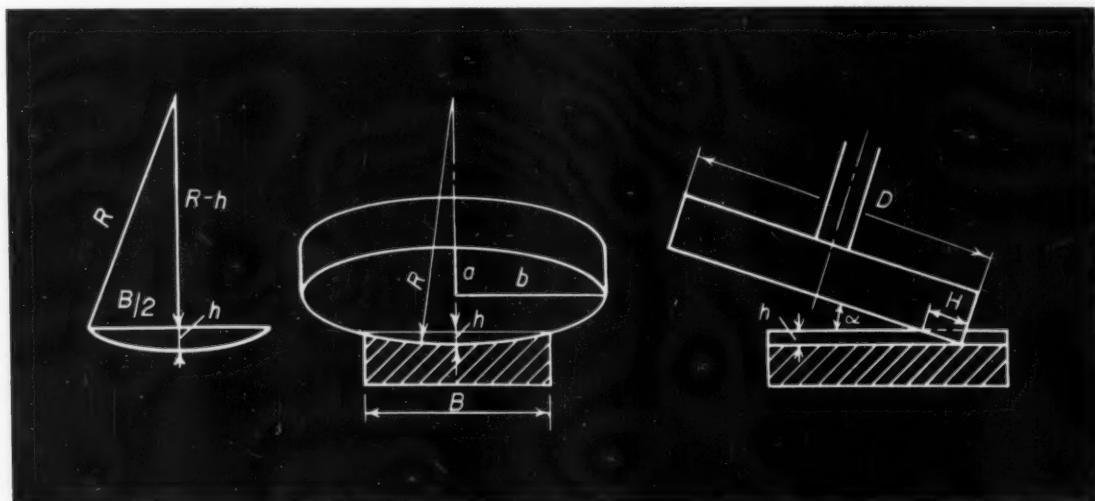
Geometric relation between work-piece and cutter when cutter-spindle is tilted at angle α .
